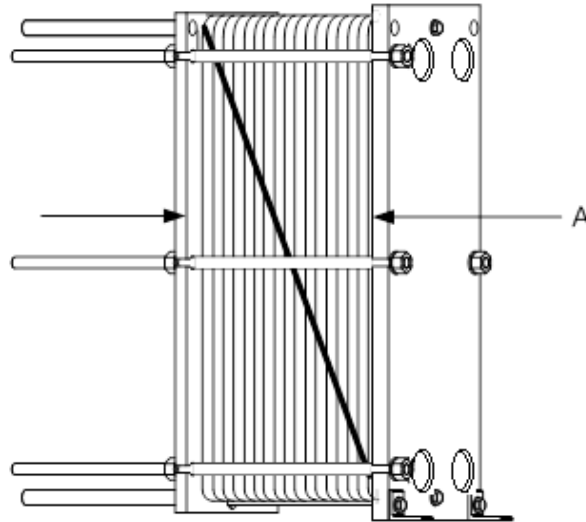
Measurement of Plate Pack Dimension "A" – Splash Guard Removed
